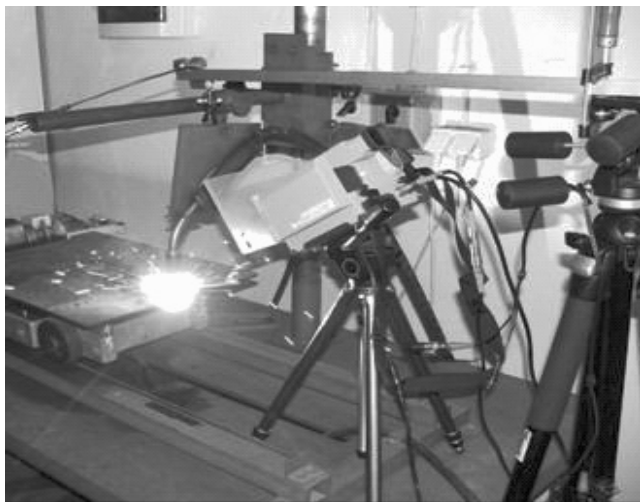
A view of automated GMA stand for brazing copper thin foil-pipe joints of solar collectors parts (during thermovision pictures recording)
